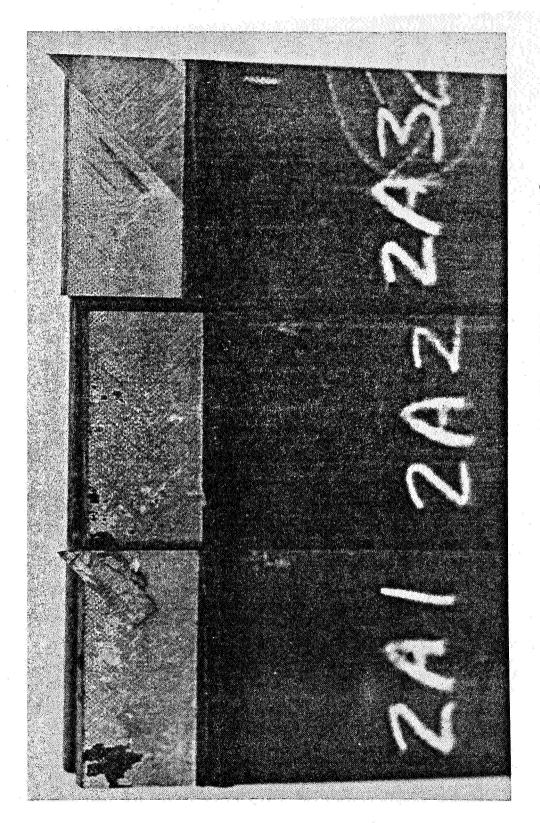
Lap Shear Specimen Failures on Trichlor Wiped Silicone Rubber Surfaces.
